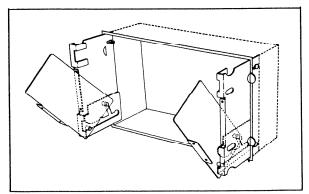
Mounting Mechanism and Tilt-Out Feature.
